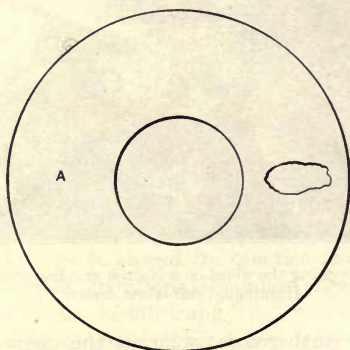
Balancing a grinding wheel by chipping the heavy side.
